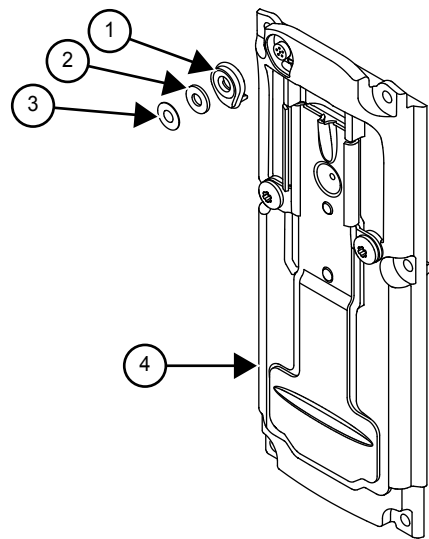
Back Chassis Assembly (Top Display Versions) - APX 8000XE
